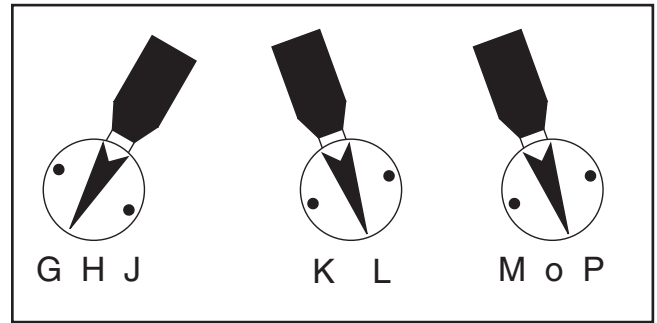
Spindle speed selectors shown set at 1280 RPM.
